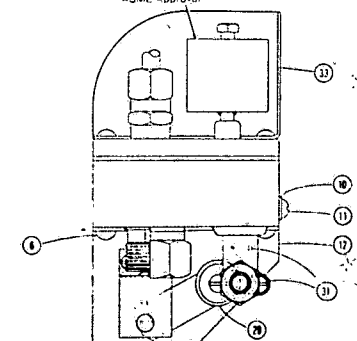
A CONTROL HOUSING ASSEMBLY
